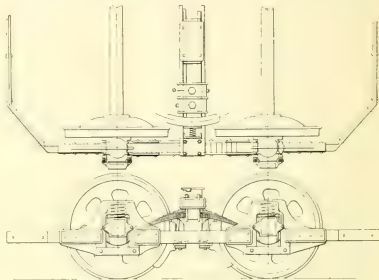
MOTOR TRUCK, BUILT BY THE BEMIS CAR BOX CO.
